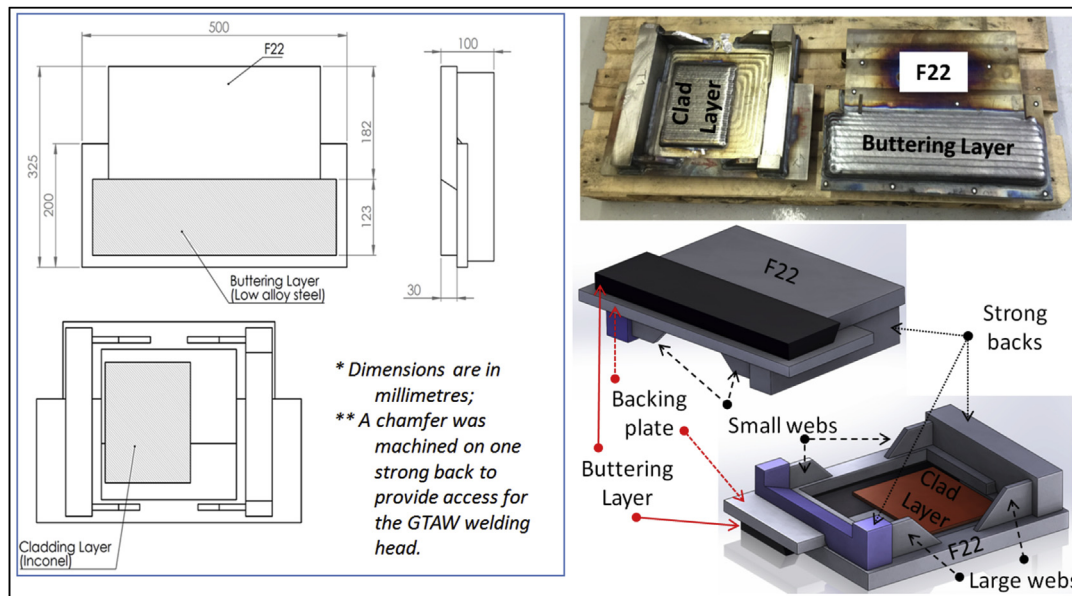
Specimen geometry and dimensions (all dimensions in millimetres).
